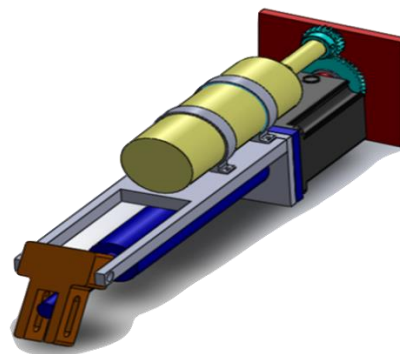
The second iteration for the upper arm with the following components: upper arm to shoulder attachment plate (red), the elbow joint (brown), the rotational motor (gold), elbow support structure (grey), the linear actuator (blue), and the linear actuator motor (black).
